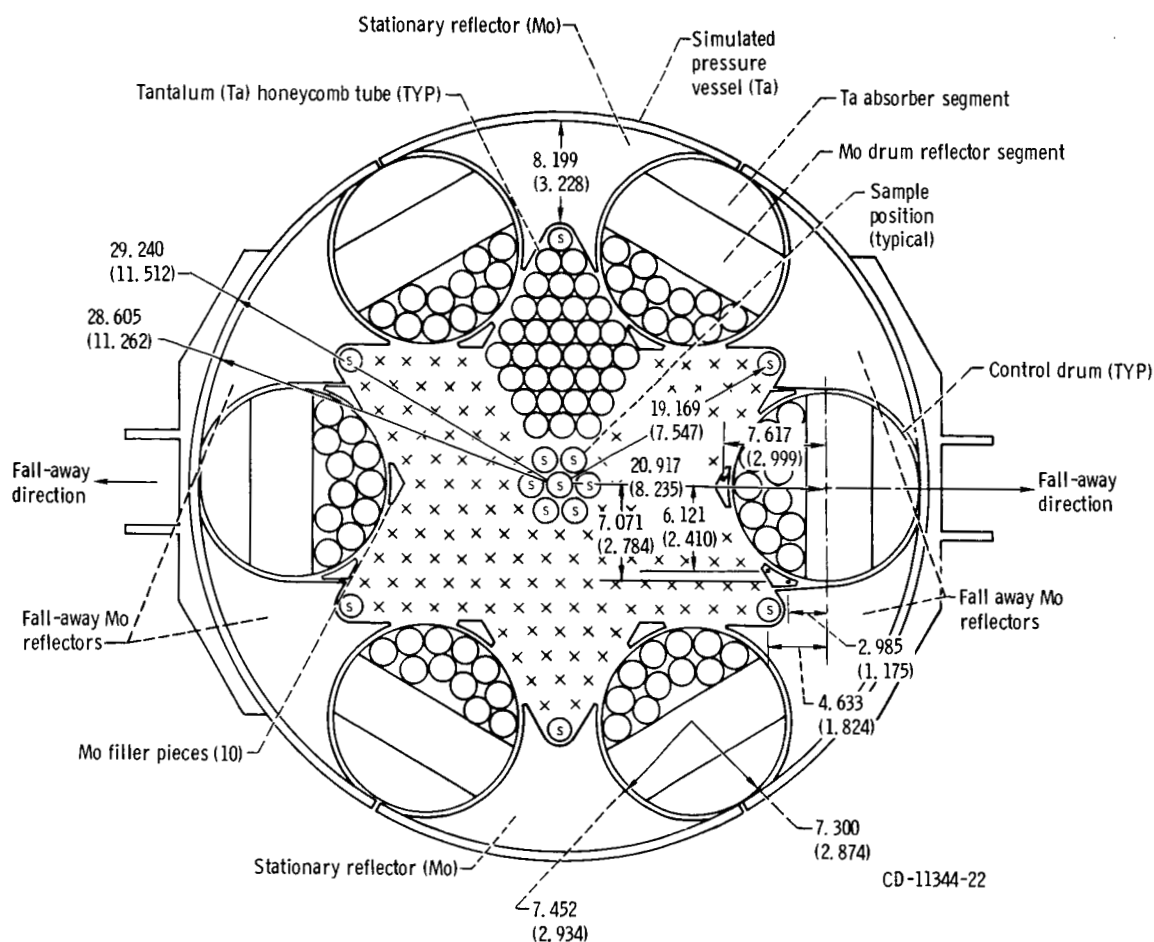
Cross sectional view of critical assembly at core midplane. (All dimensions are in centimeters (in.))
